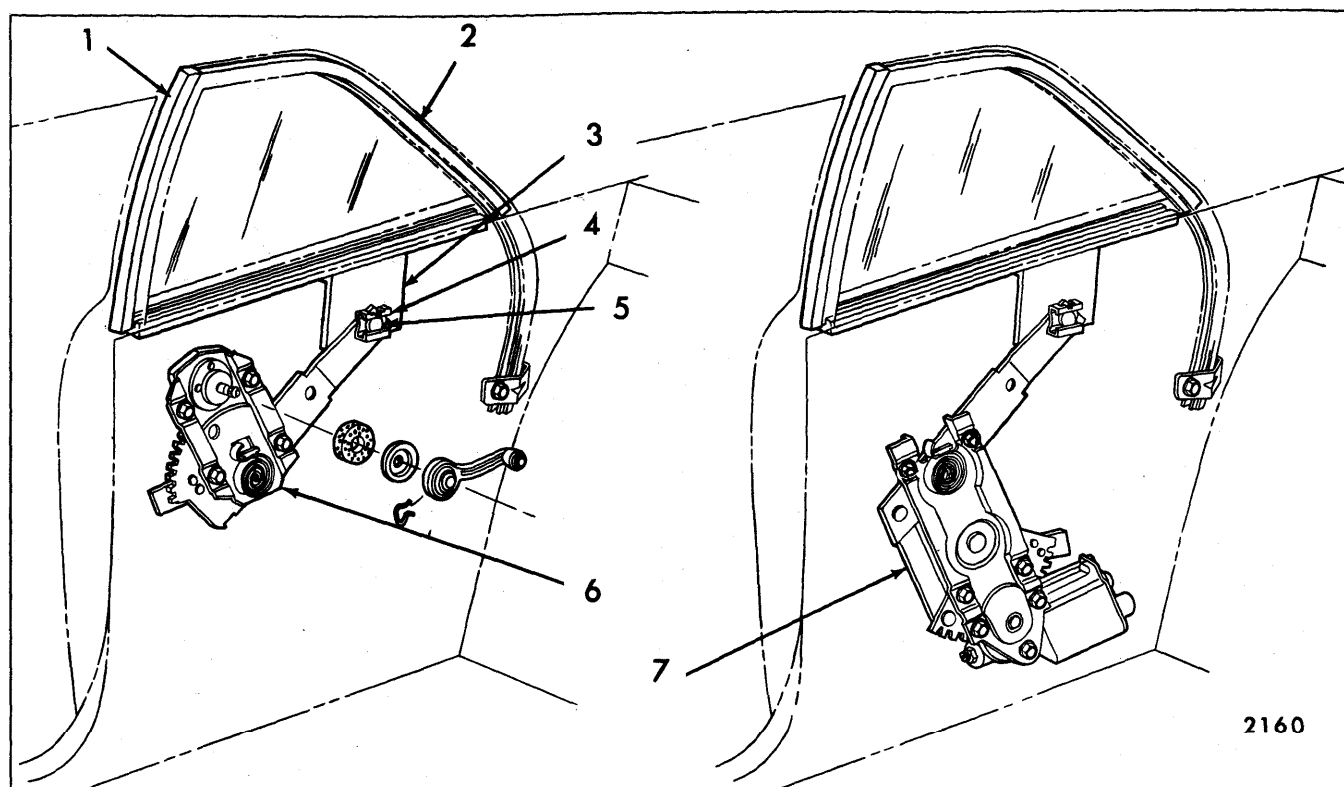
Rear Quarter Hardware - "A-11" Style
